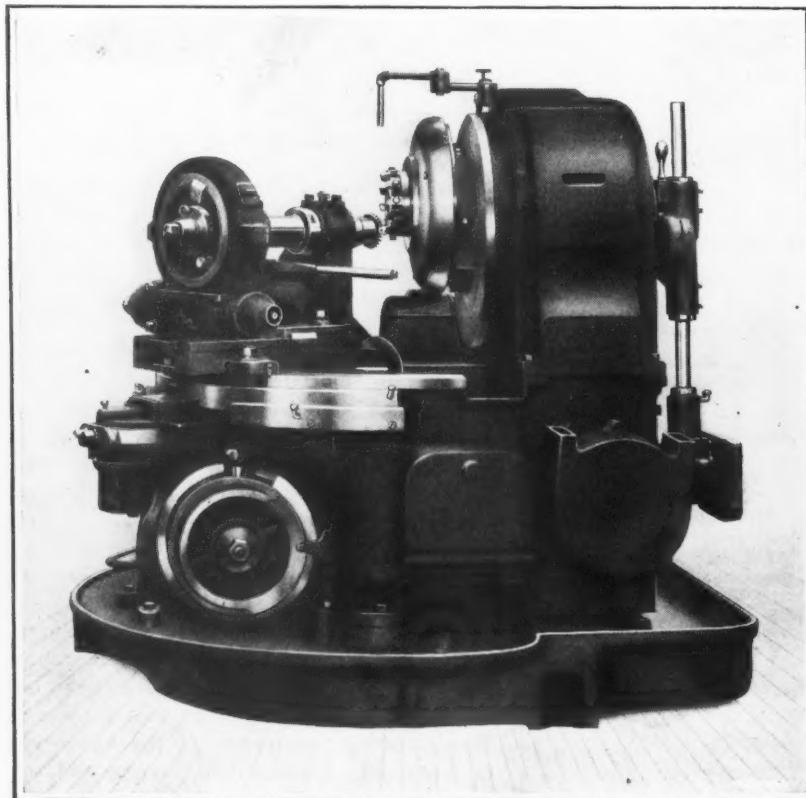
Eight-inch Spiral Bevel Gear Generator manufactured by the Gleason Works
